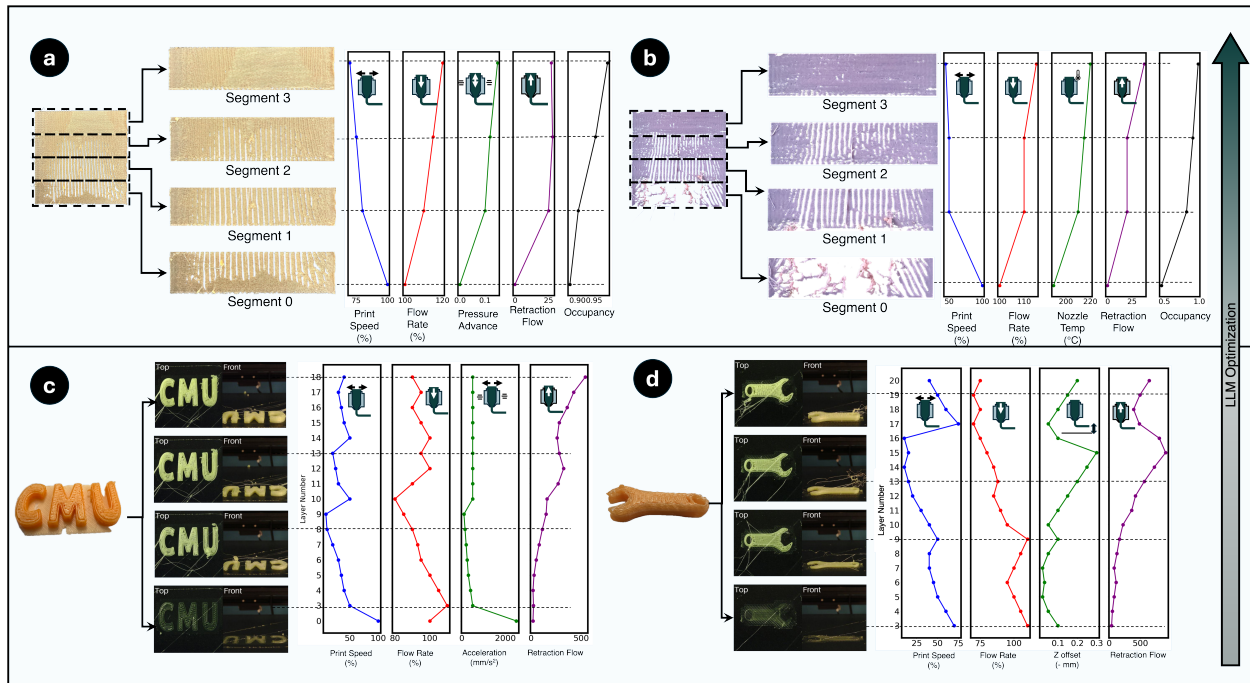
LLM print parameter optimization For single layer prints using (a) PLA, (b) TPU and for multi-layer prints of (c) text and (d) wrench.
